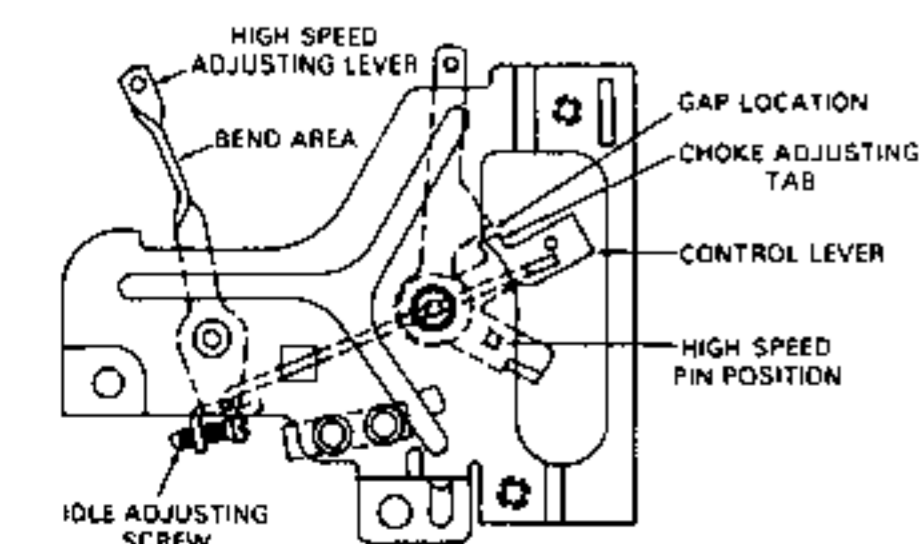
Drawing of typical speed control plate used on engines equipped with remote control linkage.
